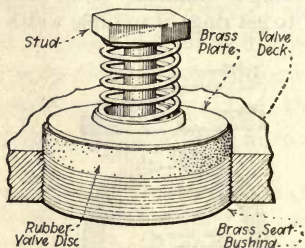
Rubber Pump-Valve Flat-Disk Type.
